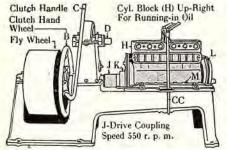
A burning-in machine being used for running-in the engine bearings in oil, or burnishing-in. The main and connecting rod bearings, and the piston and piston rings are also run-in. Note that the lower coupling (J), which turns the crankshaft at 550 r.p.m. is used in this instance.
